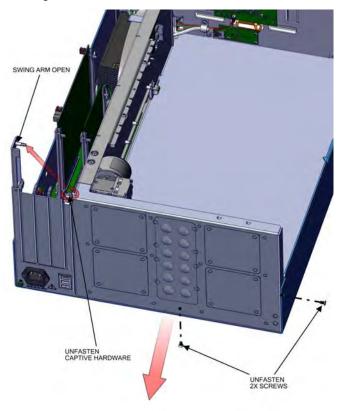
Unfasten Hardware Rear for Measurement Side Removal
